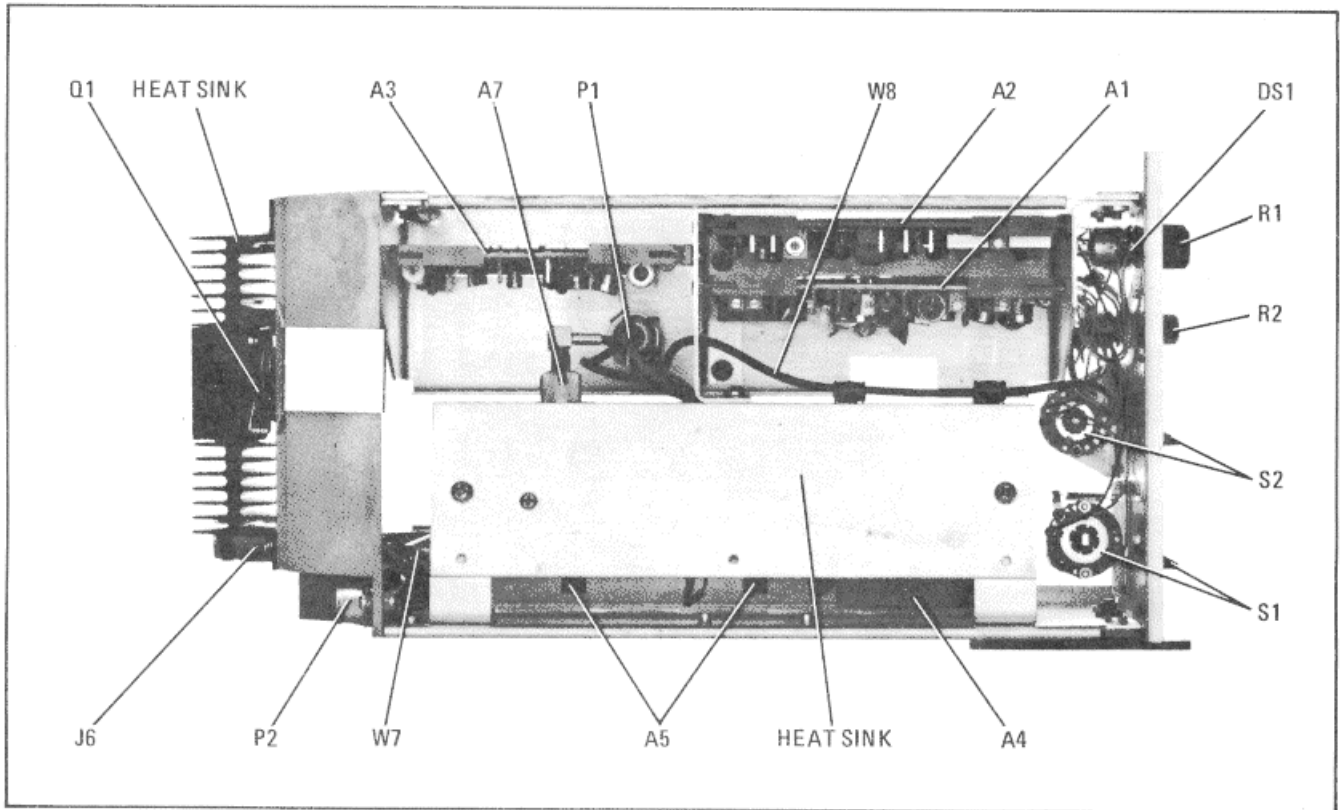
Location of Major Assemblies, Top View (Option 001/004)
